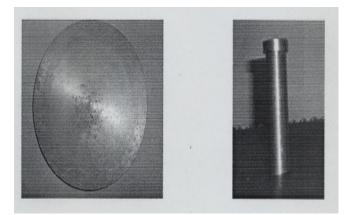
Intial Tribometer disc and pin for wear test prepared by stir casting method
